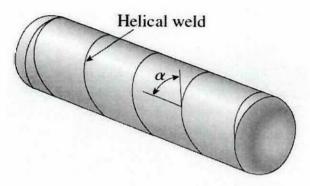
Cylindrical pressure vessel with a helical weld
